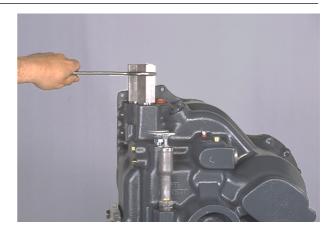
Remove modulator valve housing. NOTE: for single modulation and hydraulic inching. See section 11.1.
